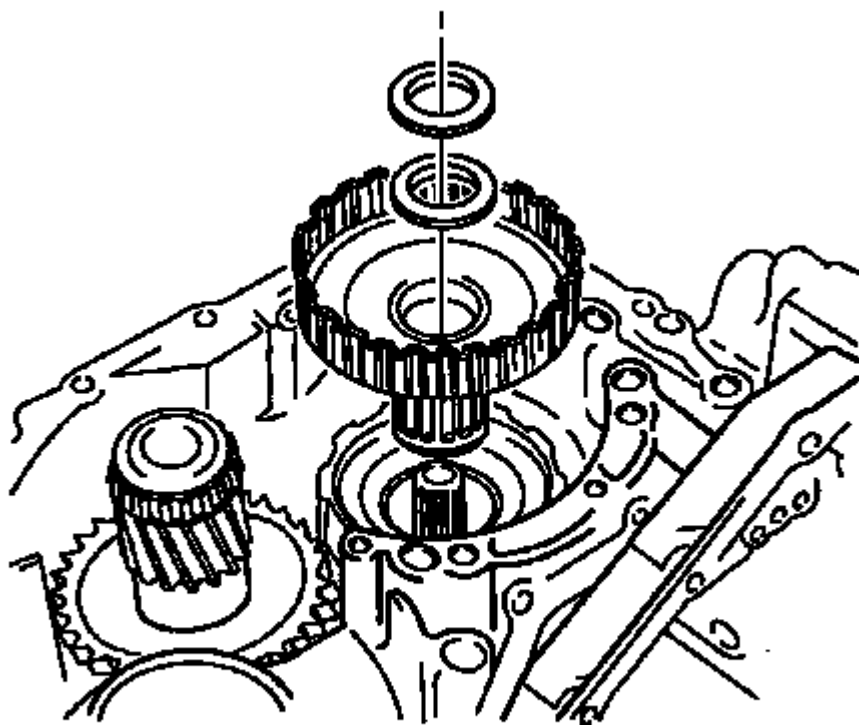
Direct Clutch Hub, Thrust Needle Roller Bearing, Race & Transaxle Case
